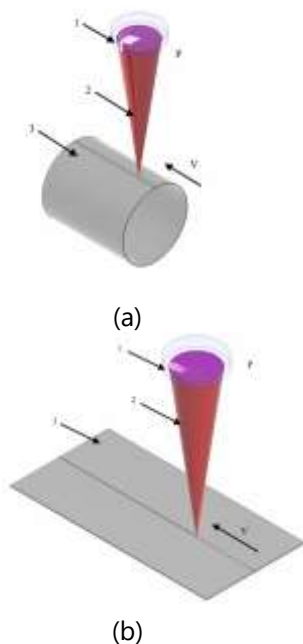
Welding schemes: (a) cylindrical specimens; (b) flat specimens, where 1 - lens, 2 - laser beam, 3 - specimen to be welded
